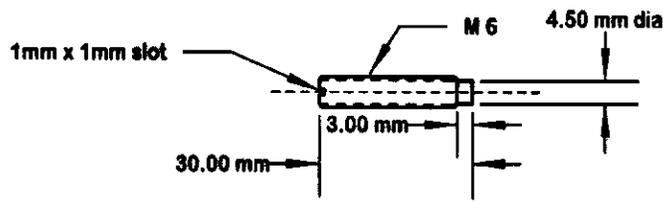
SECTIONAL VIEW OF COMPRESSION SET FIXTURES
